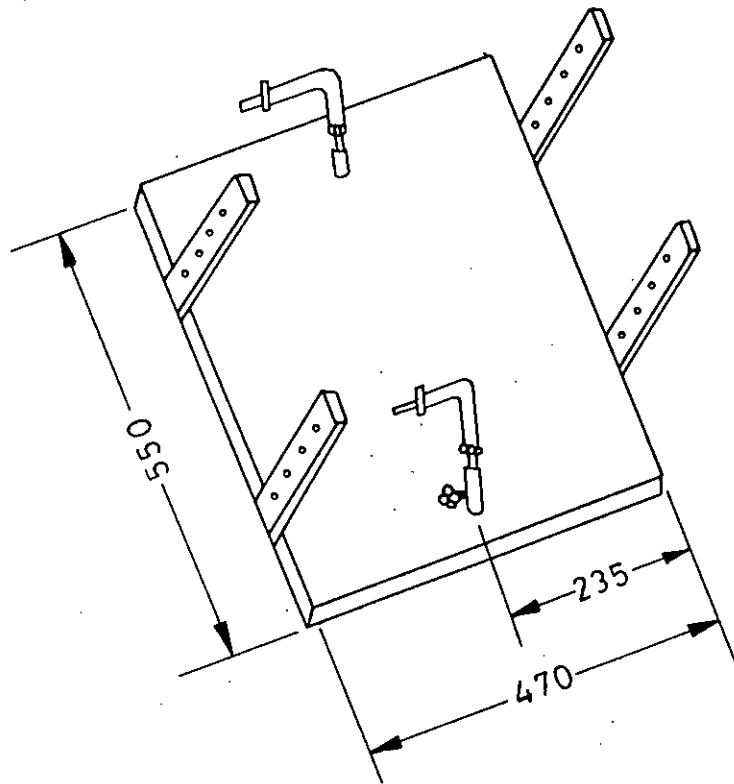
DETAILS OF THE COLD PLATE ASSEMBLY
